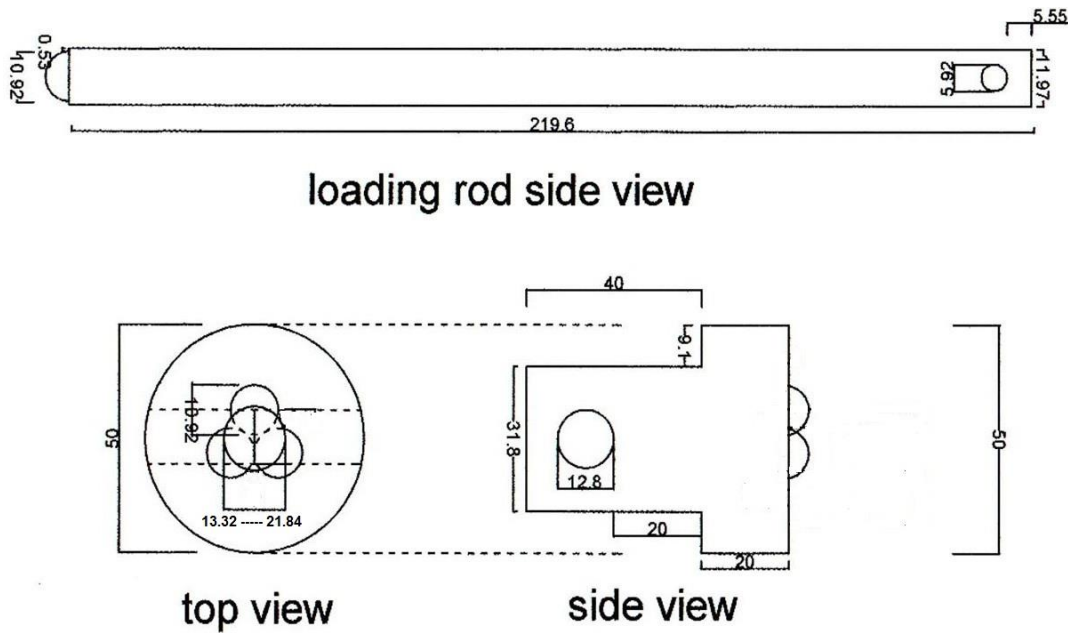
Structure diagram of B3B test fixture (UOB design)
